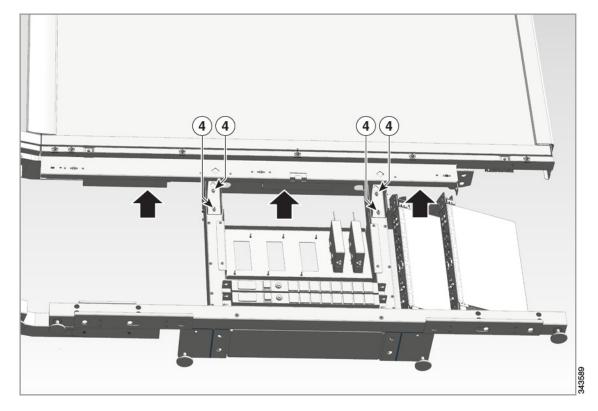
Facade Bracket Installation (4 of 5)—Securing the Screws and Location of Screws Inside the Diamond-Shaped Holes
